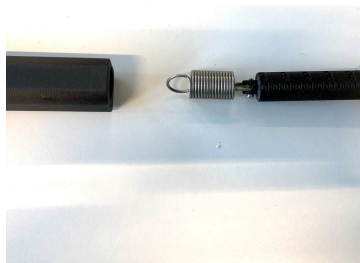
Assembly of the handle and the spring to the housing of the device.
